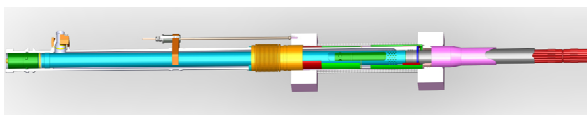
Schematic illustration of calandria tube with pressure tube, end fitting and fuel bundle
